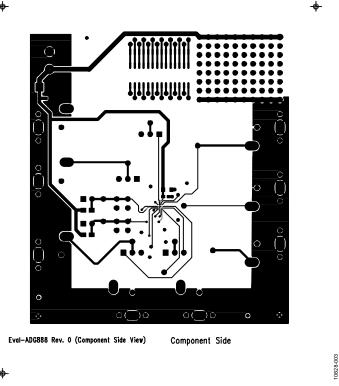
EVAL-ADG888EBZ Evaluation Board, Component Side Printed Circuit Board (PCB) Drawing
